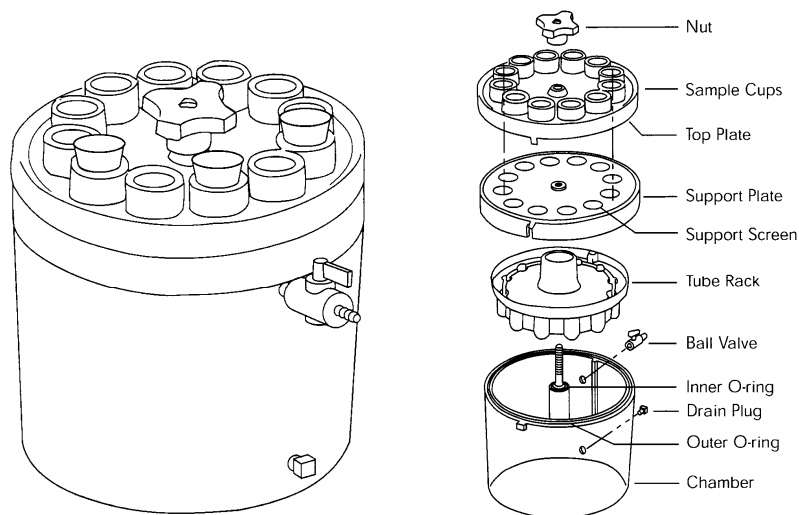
Millipore Sampling Manifold (Millipore 2000).
